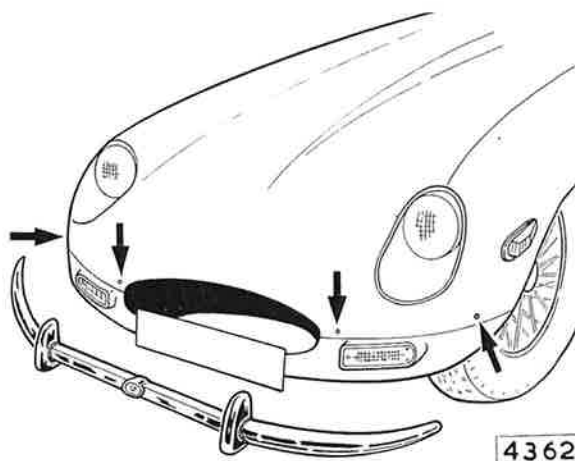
Front bumper removal. The arrows indicate the mounting points.
